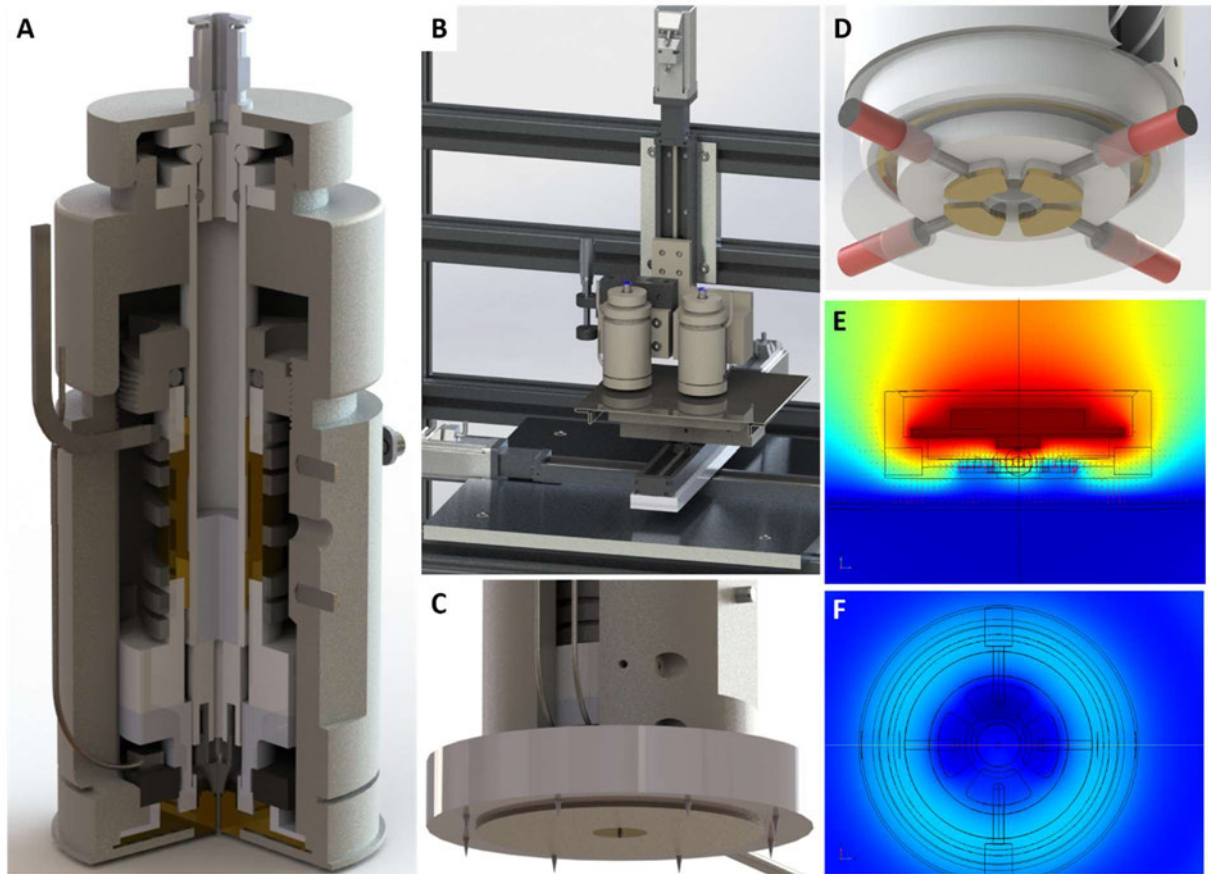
MEW head and printer design options. A: Printing head rendering with a zonal cut. B: Schematic of a double head printer setup. C: Position of discharge electrode on a printing head. D-F: Design of a headpiece (plastic body is shown semi-transparent) with four independently adjustable electrodes and a corresponding side- and bottom view of an electric field simulation.
